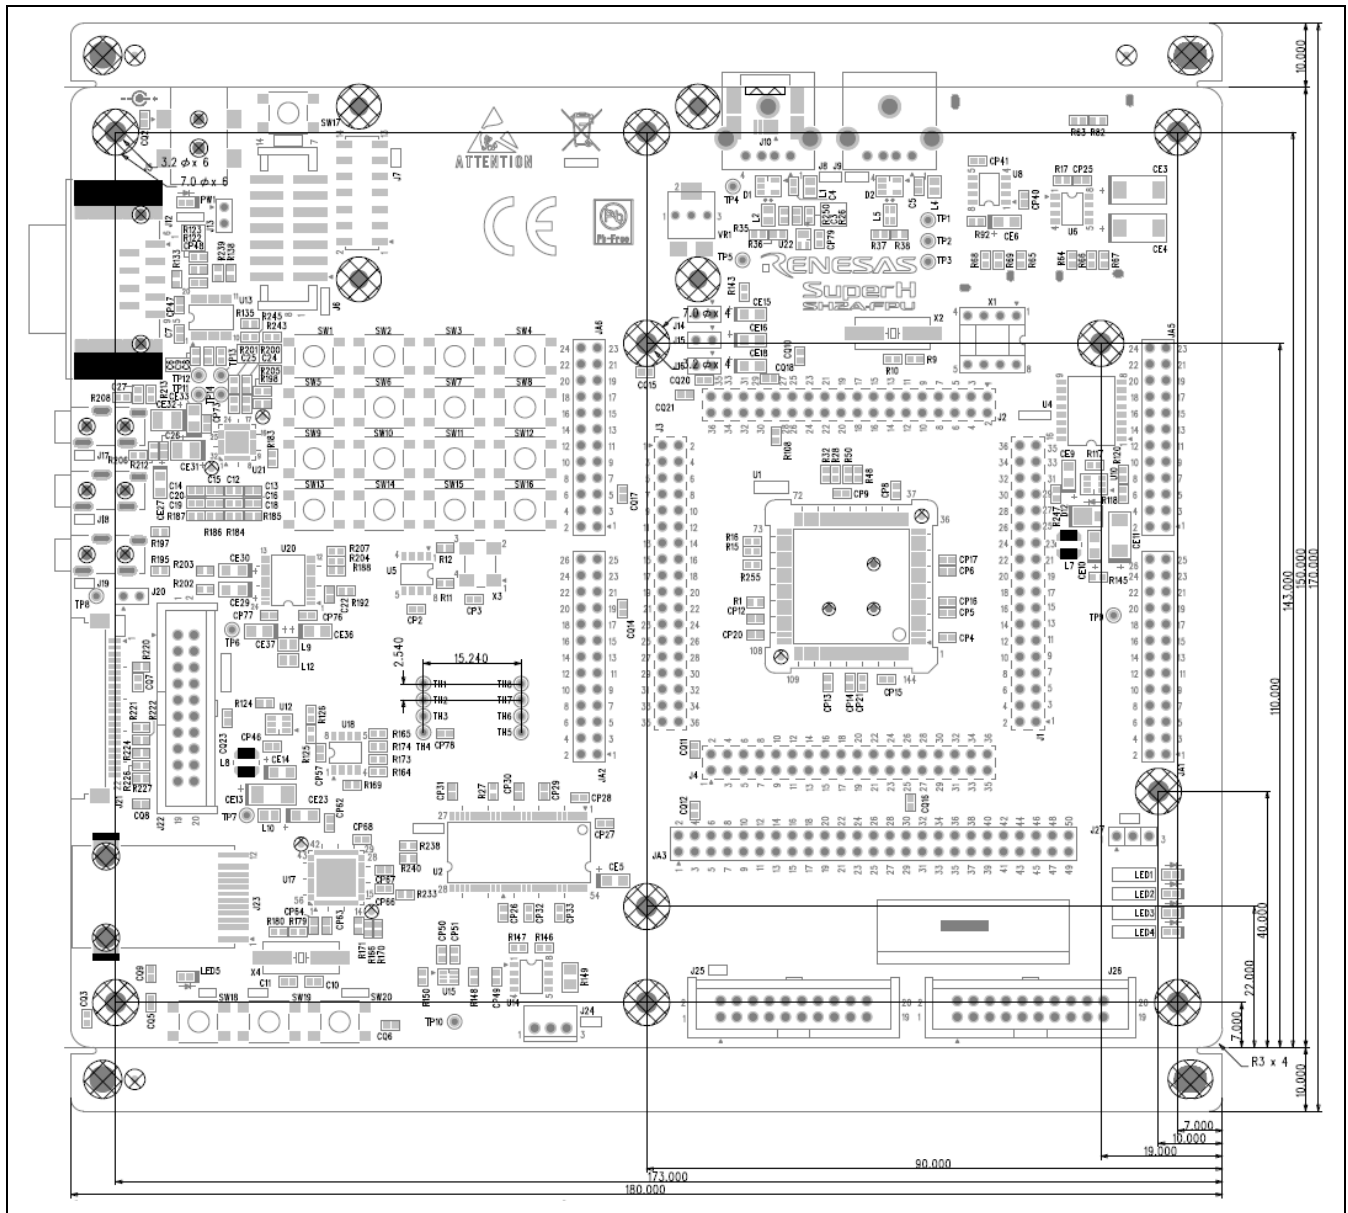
R0K5726B0C000BR Dimension 1 (Top view of the component side)
